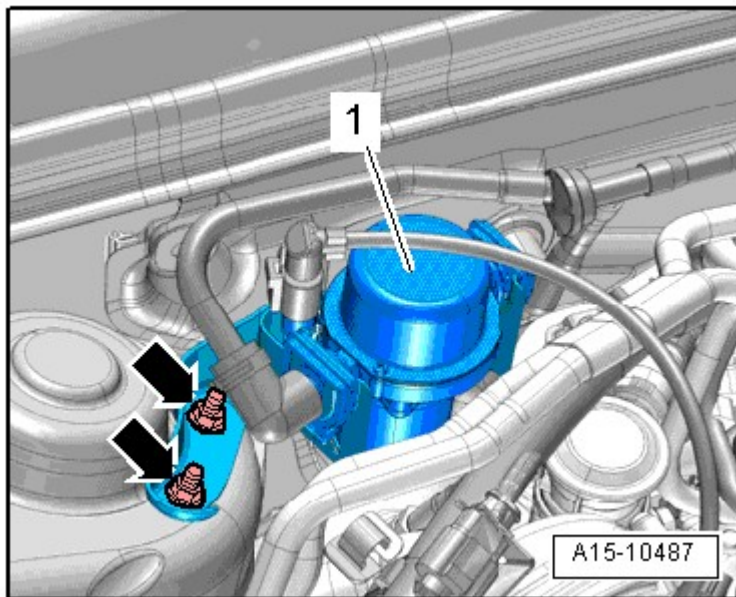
Identifying Nuts -Arrows- & Move Vacuum Pump -1- With Lines Connected To Side
